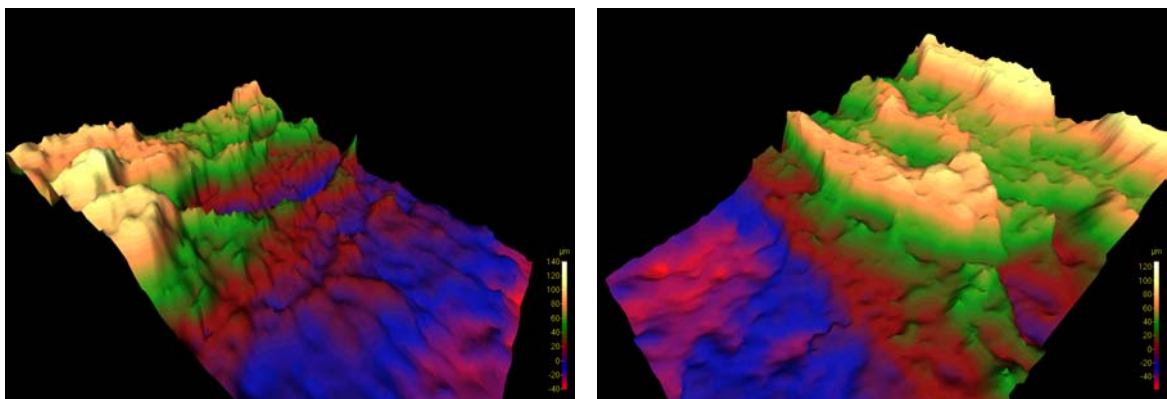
Stereoscopic SEM images of corresponding fracture surfaces from a cylindrical tension specimen with a 0.4 mm deep circumferential crack.
